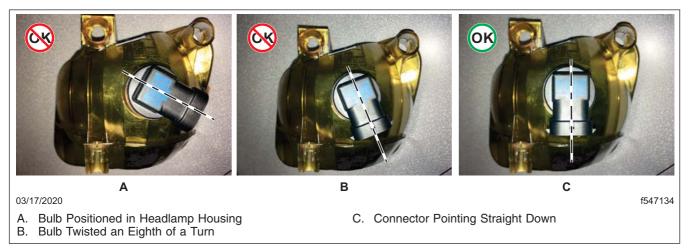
, Improper and Proper Bulb Installation, Back View
